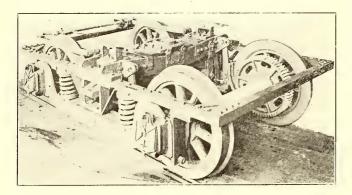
TRUCK FOR WESTINGHOUSE NO. 132 MOTORS; CENTER PIN LOAD, 32,000 LB.; WHEEL BASE, 77 IN.
